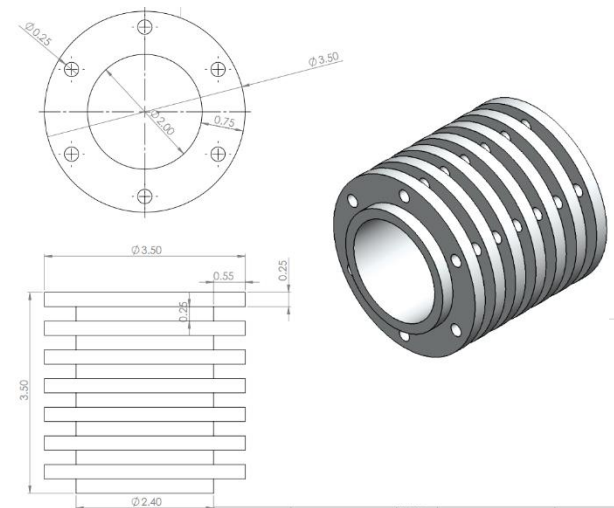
Cooling cylinder model with dimensions and designed in AutoCAD
